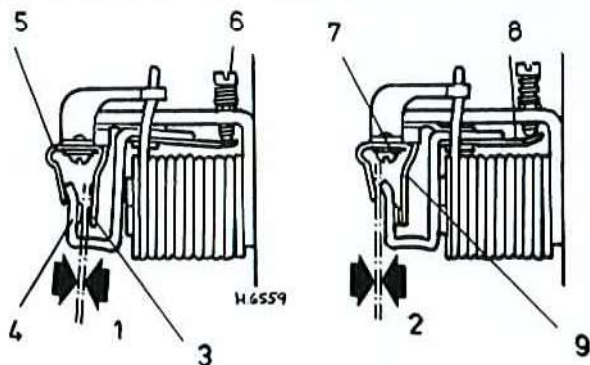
Mechanical setting of cut-out (Sec 15)
